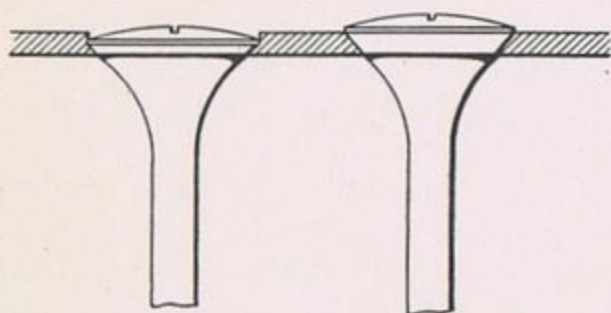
SHOWING HOW VALVES BECOME POKETED AFTER FREQUENT RE-GRINDING
